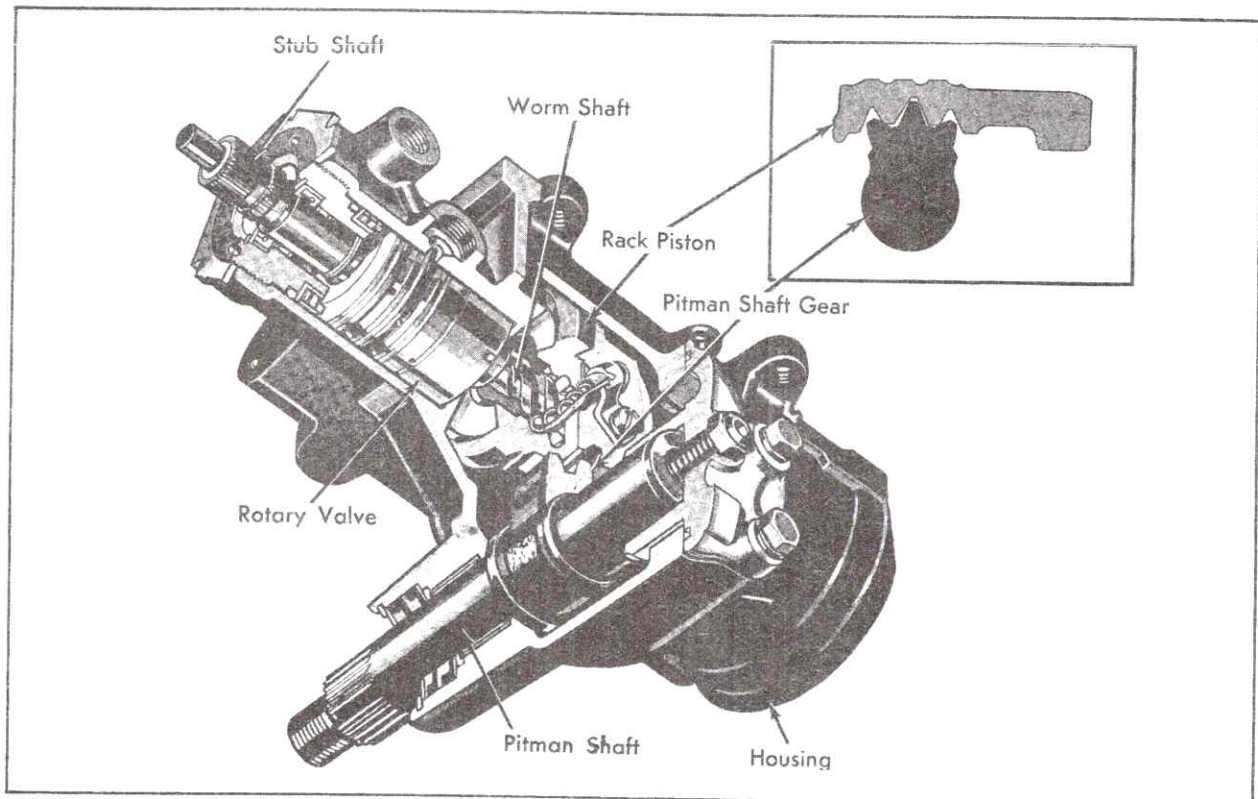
Variable Ratio Steering Gear - Cut-Away View
